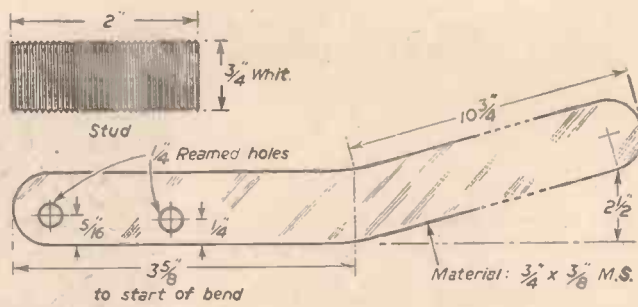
Dimensions of main lever and details of stud for fixing the body to the base.
